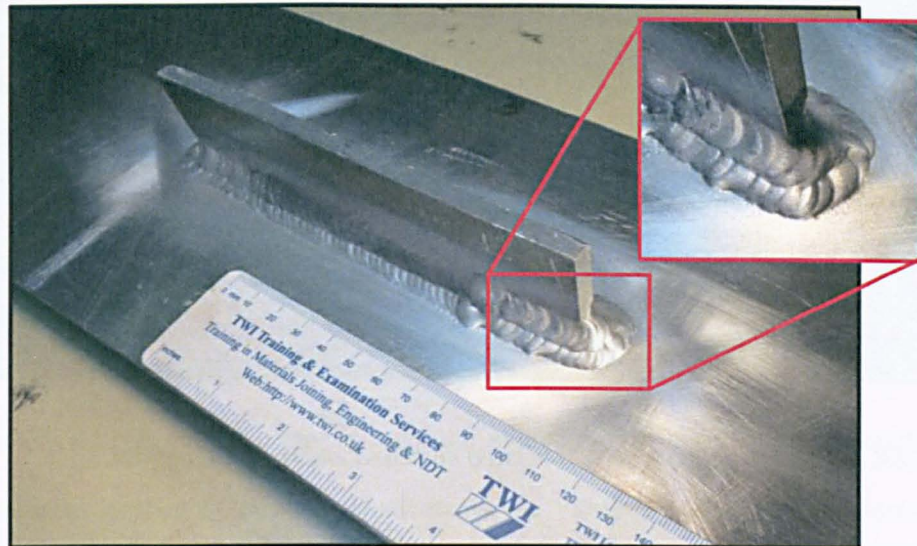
Aluminium alloy fillet welded specimen showing weld detail.
